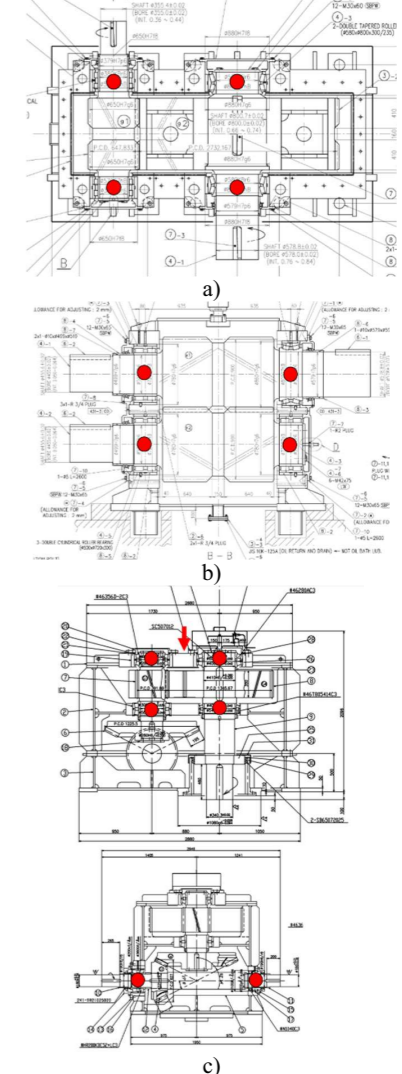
a) Finishing Mill gearbox b) Finishing Mill pinion c) Edger Mill gearbox measurement locations
